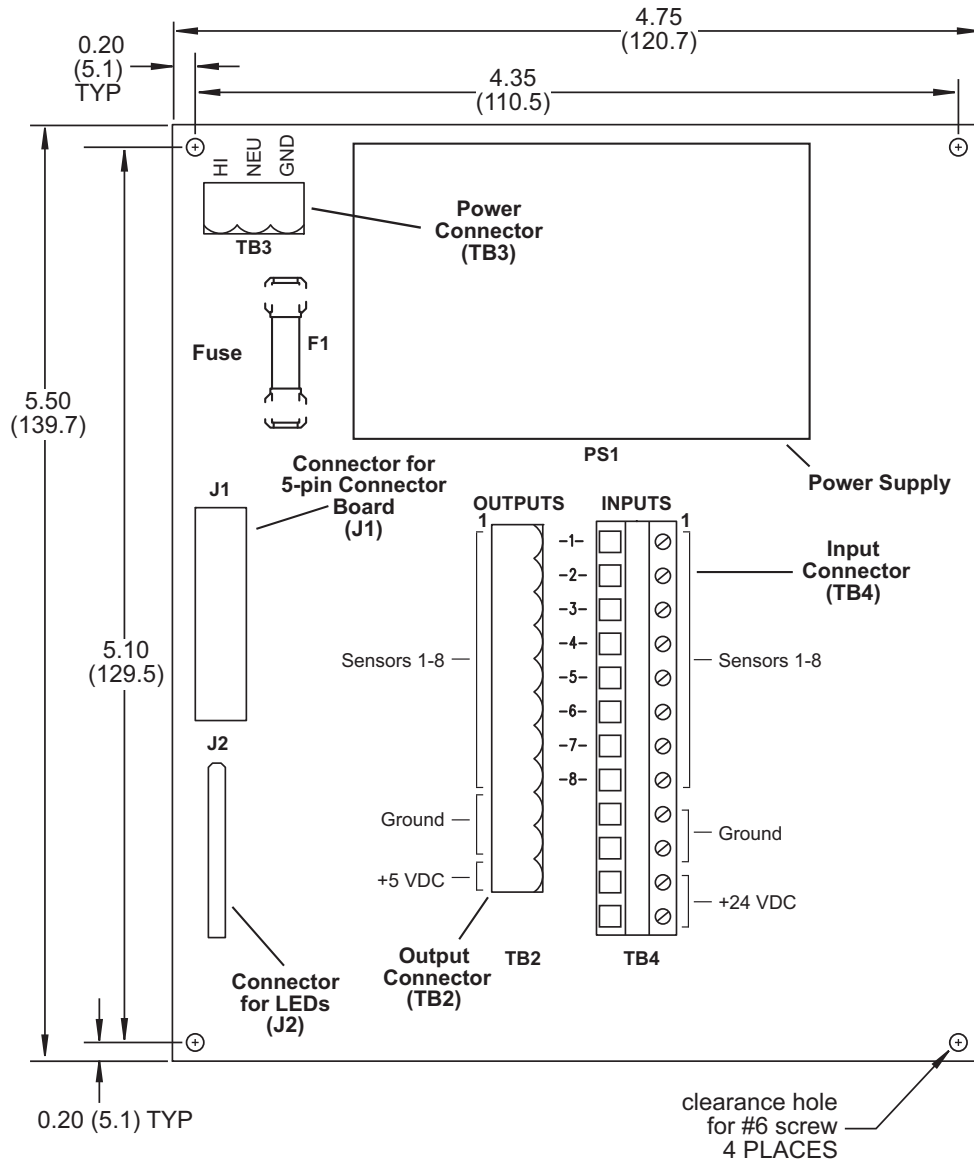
DSI 2 PC Board: Mounting Dimensions
